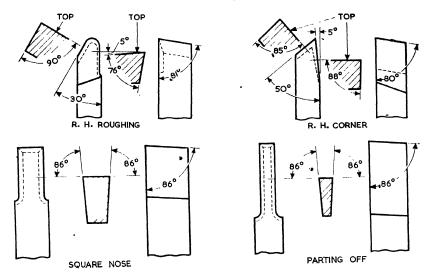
CORRECT CLEARANCES AND CUTTING ANGLES FOR INSERTED PLANER TOOLS
